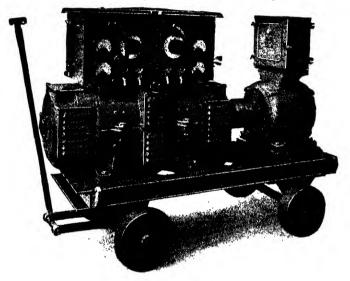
DOUBLE-OPERATOR SET MOUNTED ON BOGIE
